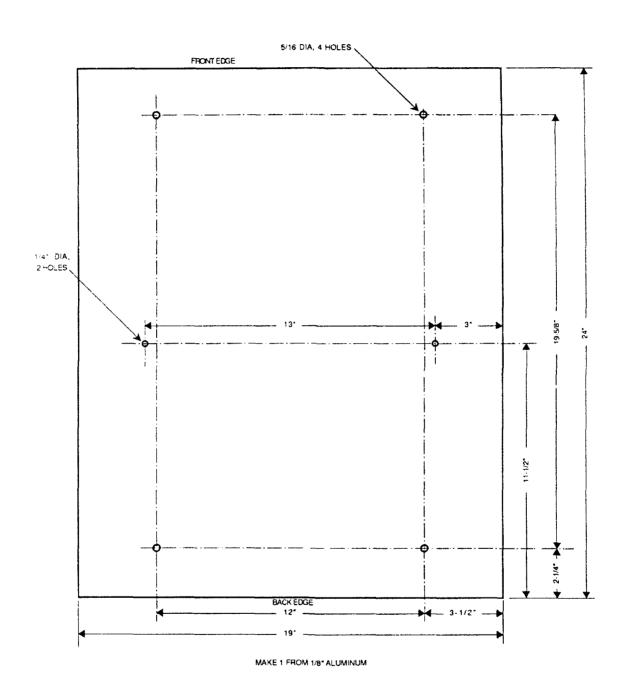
BOTTOM PLATE CUT AND DRILL GUIDE
